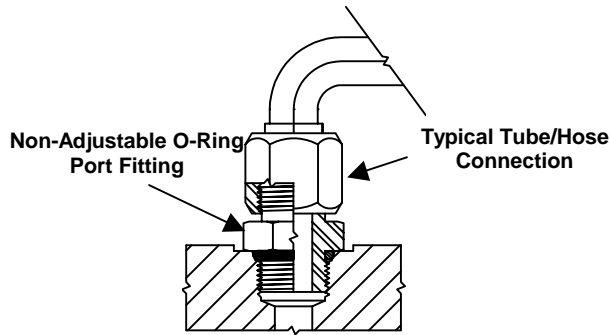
Typical Straight Stud End O-Ring Port Installation
